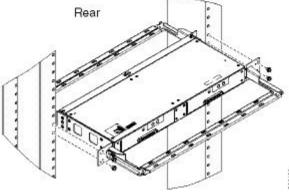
Attaching 23-inch Brackets to Patch Panel - Single
